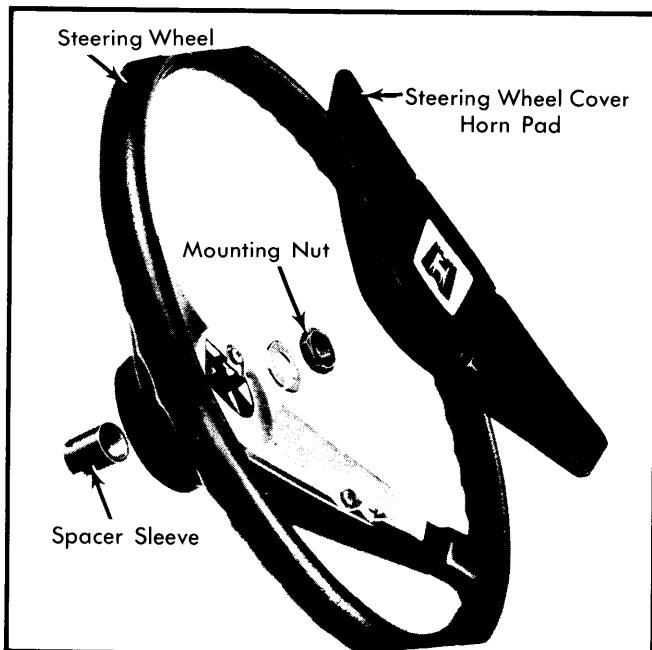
Typical Volkswagen Steering Wheel Rabbit and Scirocco Shown
